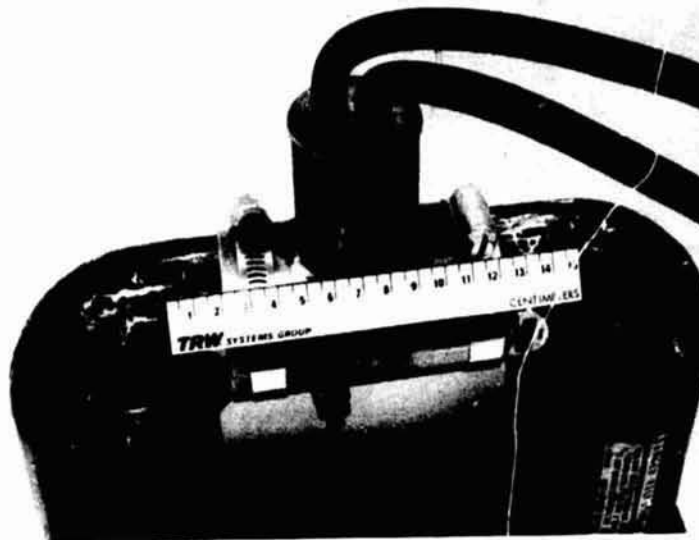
View of Disassembled Housing Showing Electrical and Mechanical Connections
